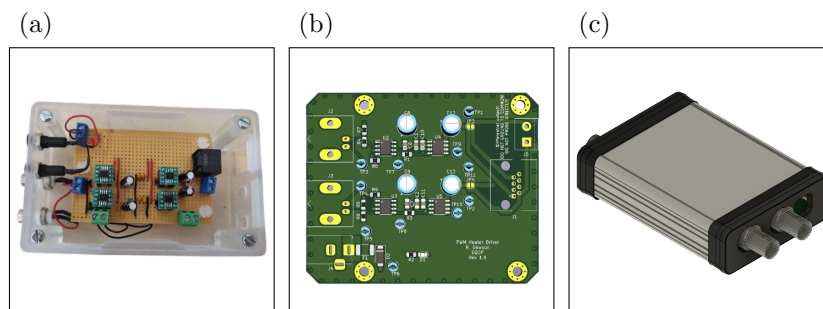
High efficiency heater driver: a) Prototype stripboard version, b) printed circuit board (PCB) design, c) computer aided design (CAD) drawing of the external casing and BNC connectors
